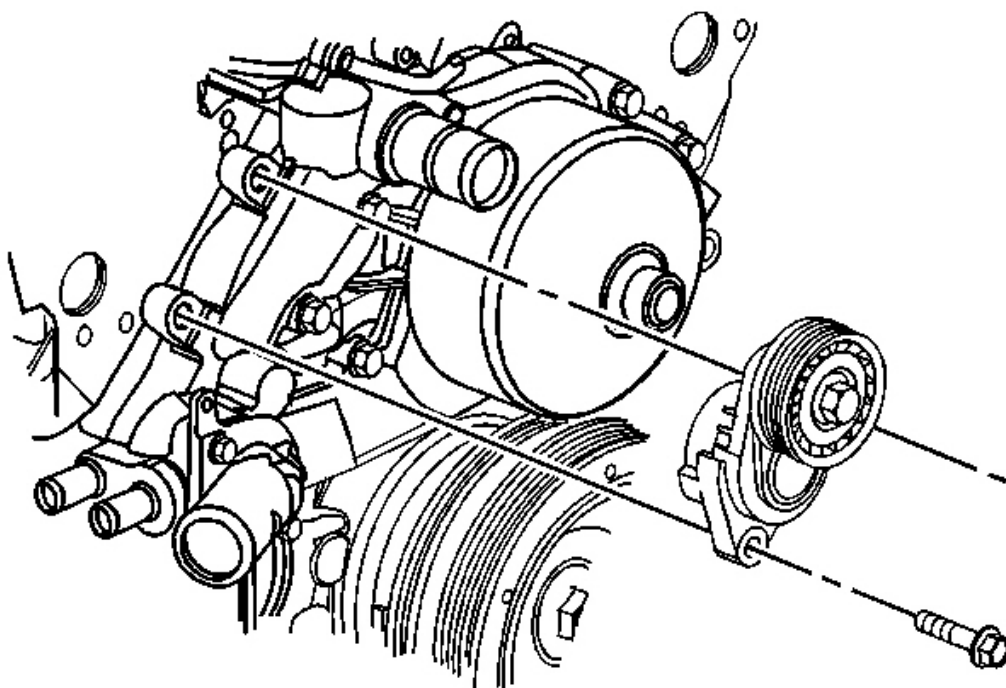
Accessory Drive Belt Tensioner & Bolts
